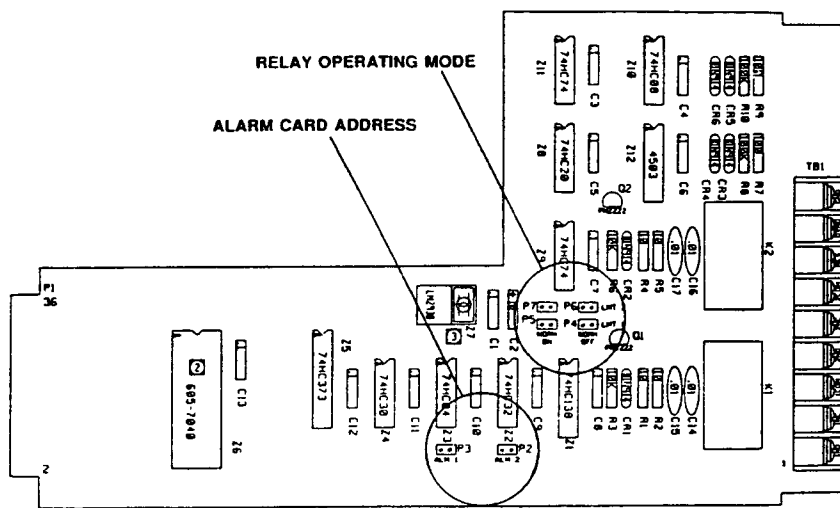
CONFIGURATION TERMINAL PINS, ALARM CARD
